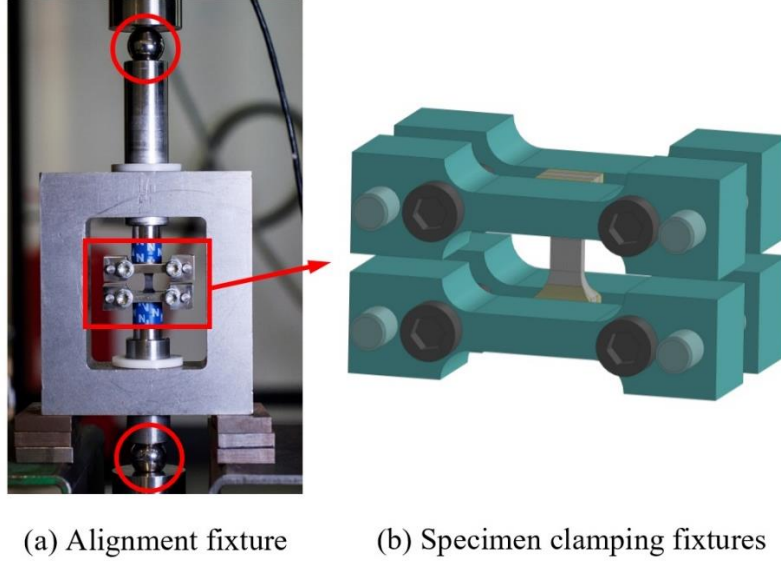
Alignment and clamping fixtures used in fibre compression tests: (a) bearing balls (circled) and alignment frame set-up, which ensures a strictly axial load is applied to the specimens; (b) close-up view of the compact clamping fixtures is shown.
